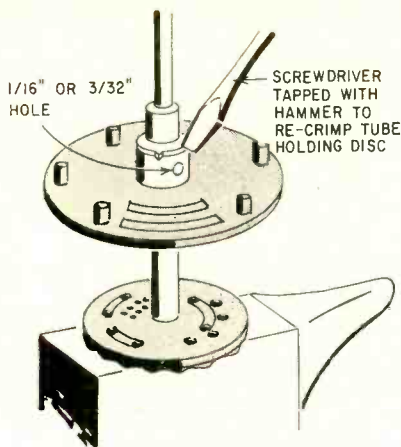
Tightening top disc of Admiral tuner. Also shown is hole in hub for strengthening pin.
